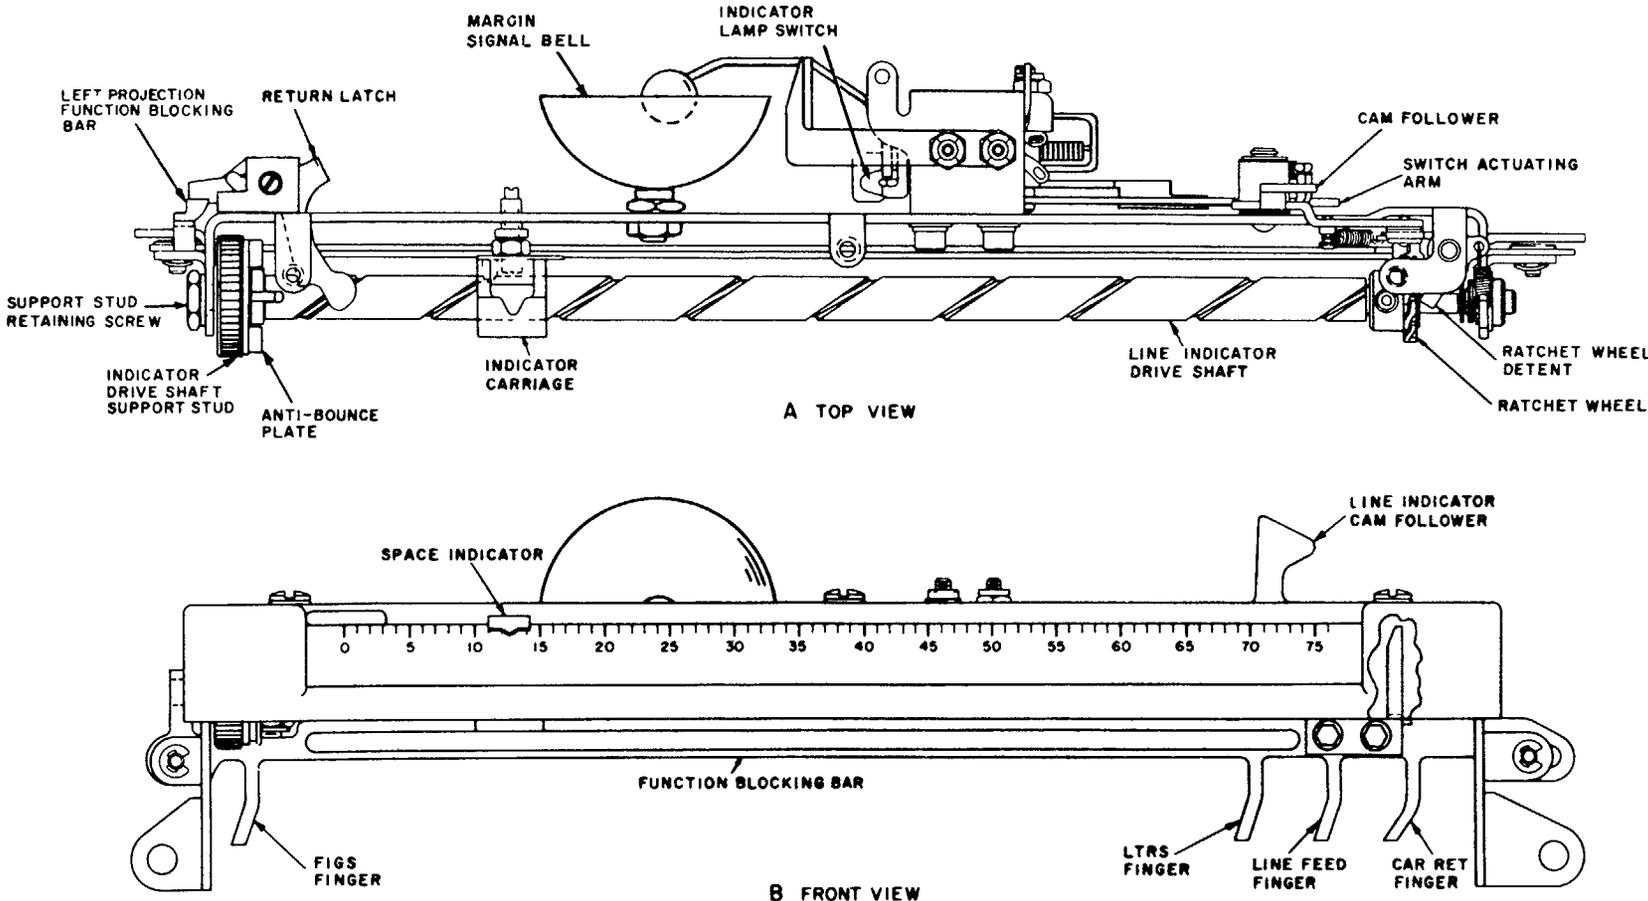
Character counter and end of line indicator mechanism (TT-76B/GGC serial Nos. 255 and below, Order No. 13931-PC-58).
